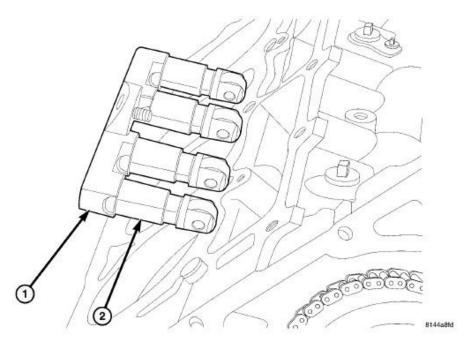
HYDRAULIC ROLLER TAPPET REMOVAL/INSTALLATION Courtesy of CHRYSLER LLC
